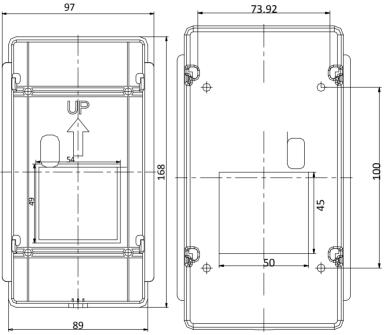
Front View & Rear View (DS-KV8X02-IM)
